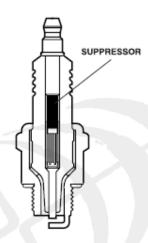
A one-piece integral suppressor reduces RF interference.
